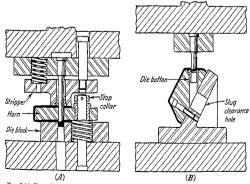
Horn dies (A) piercing opposite holes in shell with one punch in one press stroke; (B) piercing irregularly shaped shells.
